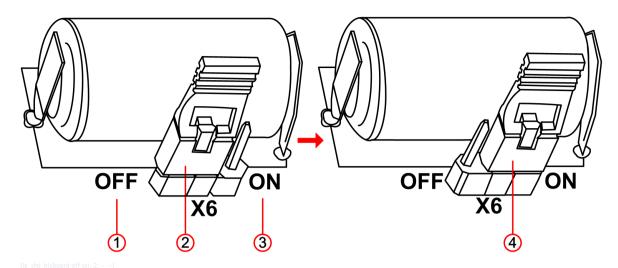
3-Pin (X6) Jumper Pin on PCBA
